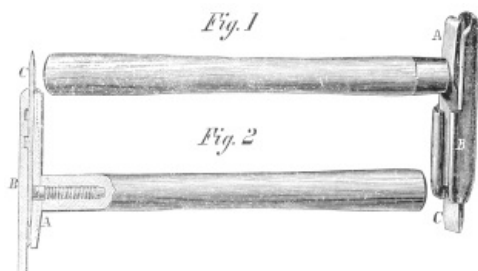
is a perspective view, and Fig. 2 a sectional view.
